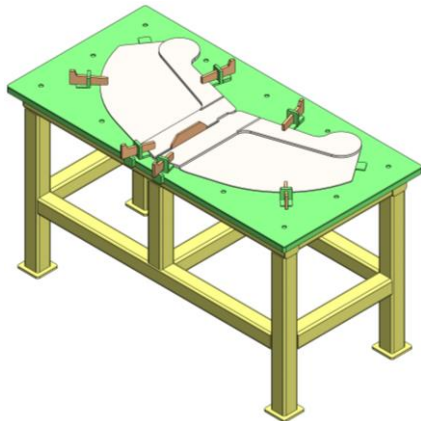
Fixture for assembling the bucket sides of the grapple buckets.
